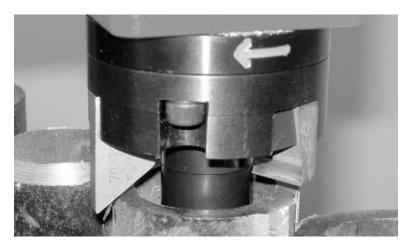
Check that the tools are positioned so that they contact the full width of the tube face.
